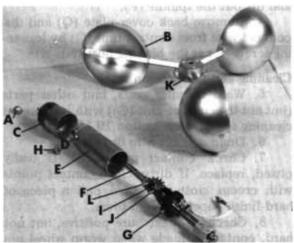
Forester 9X140 anemometer: A, Cap nut; B, cups; C, cylinder head and stud assembly; D, cylinder shell screw; E, cylinder shell with internal gear; F, main shaft; G, sprocket gear assembly; H, main shaft oil channel screw; I, sprocket gear; J, contacts; K, balance disc; L, sprocket gear striking pen.
